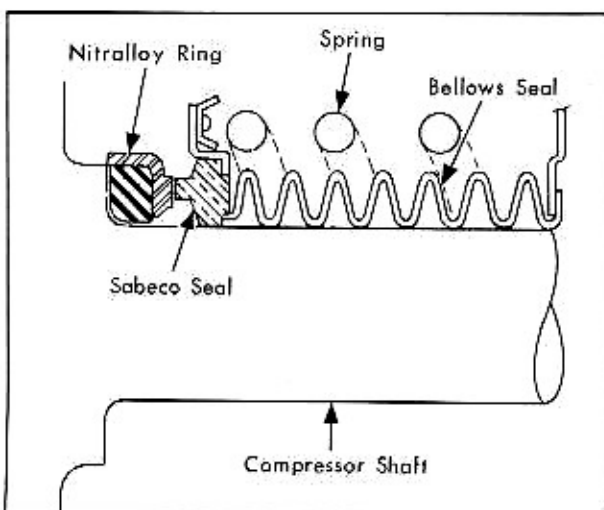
A-27 Location of Nitralloy Ring on Compressor Shaft
